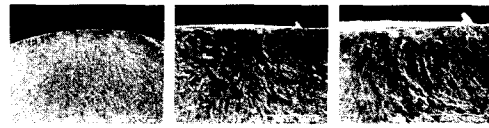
SEM photographs of fracture surface around crack initiation point for specimen SUP 7 under 1 stage shot-peened
